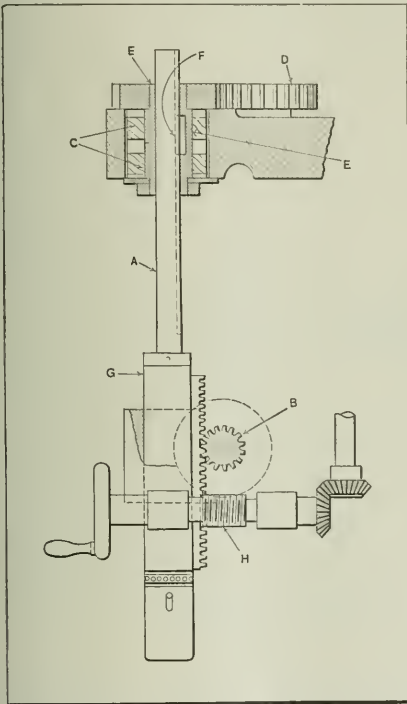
Drill Feed and Spindle Drive Mechanism of Common Construction
